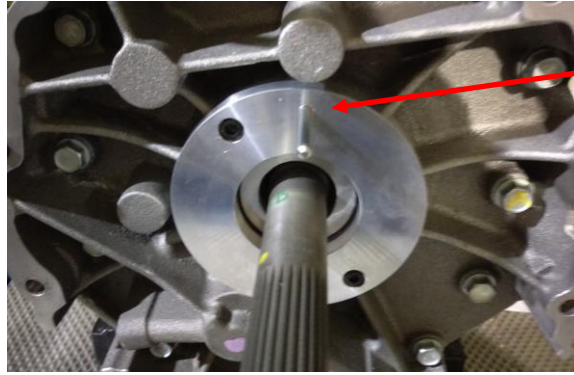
FIG. F INSTALL NEW RETAINER WITH LOCATING STUD
